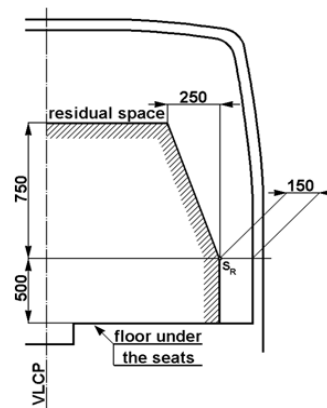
Residual space in bus cross-section [1, 2] (the dimensions are in millimeters).
